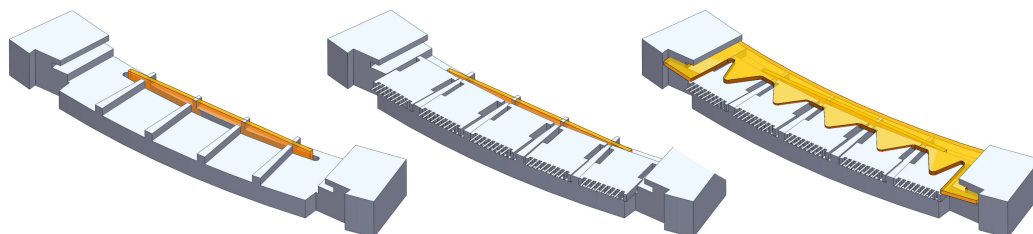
Layout of 5-chips holder designed and fabricated at the end of the project. The clamping method is the same of the holders illustrated in Figure 3.15a
